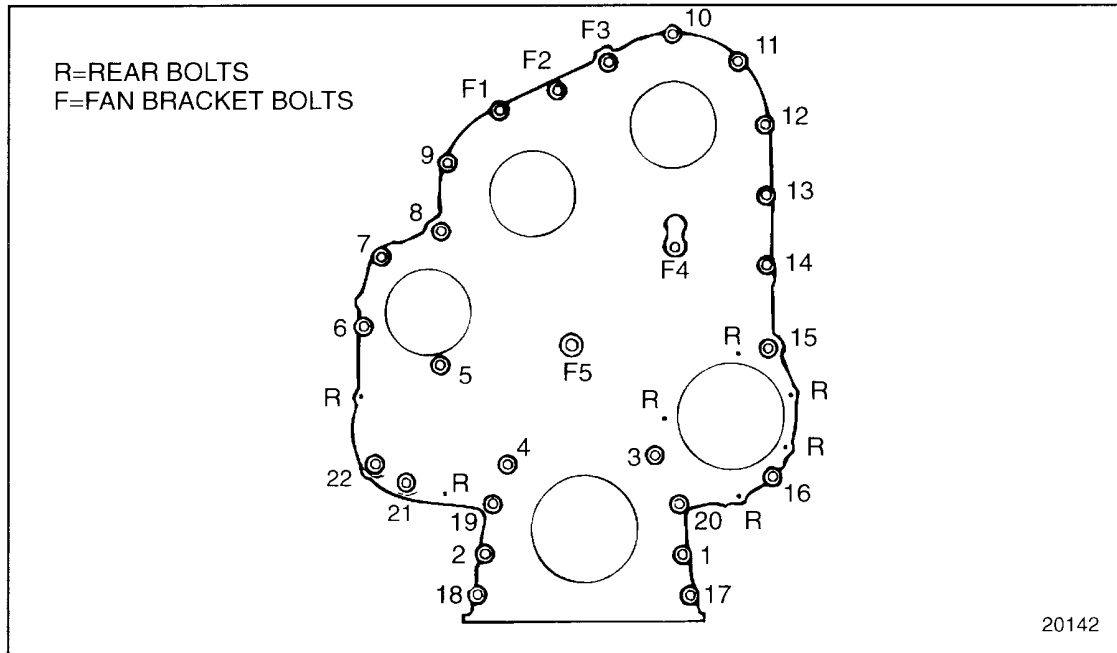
Gear Case Cover Bolt Arrangement (Front)
